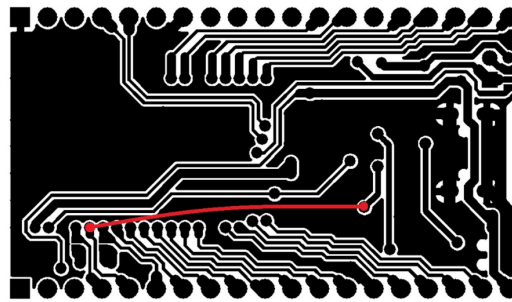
Wire (red) added to the bottom side of the ESP32-Devkit-LiPo Rev. C board
